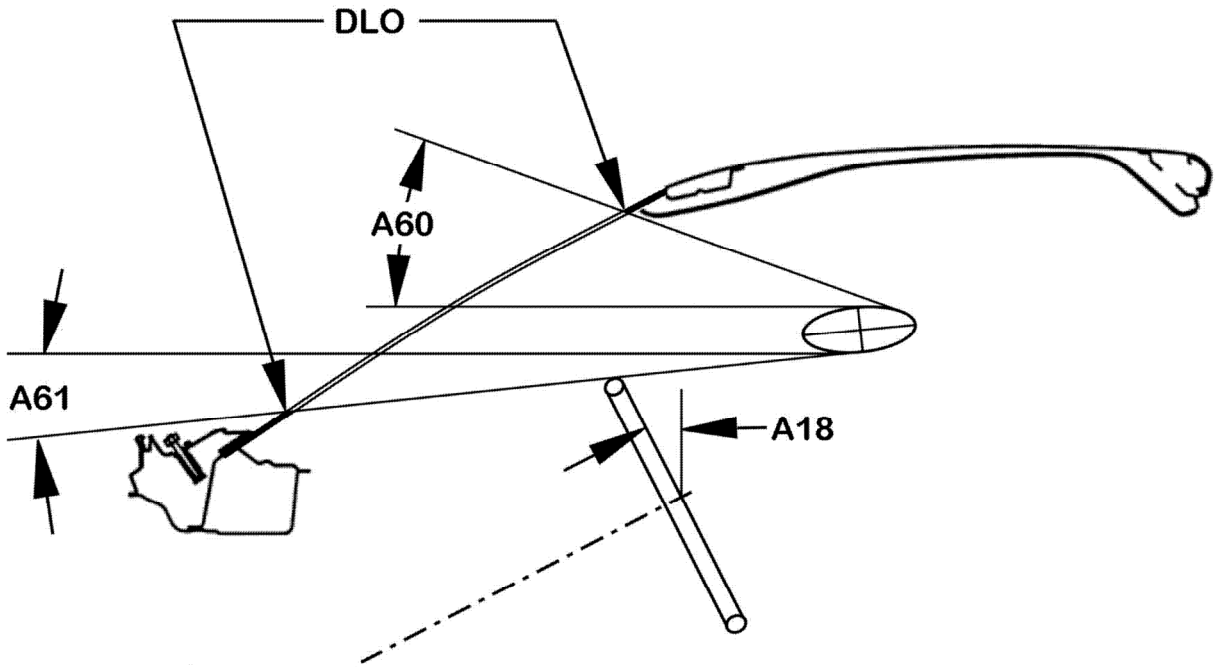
STEERING WHEEL AND EYELLIPSE
